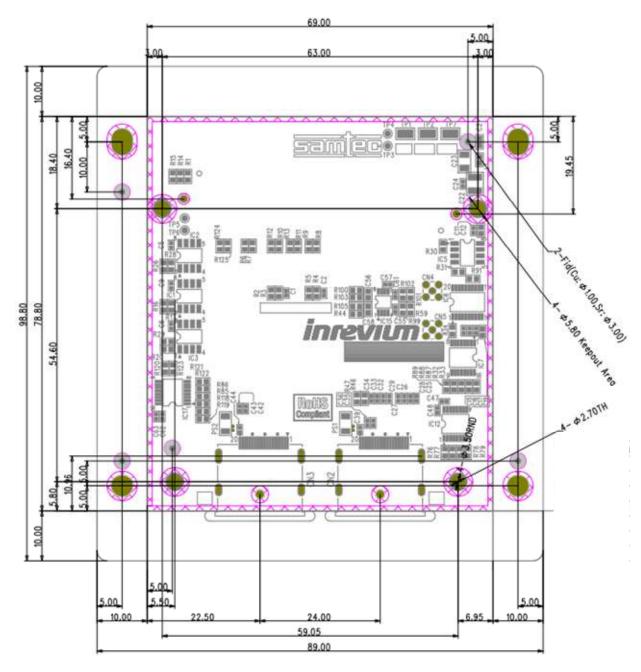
Board Dimensions (inclusive of a wasteable portion)
